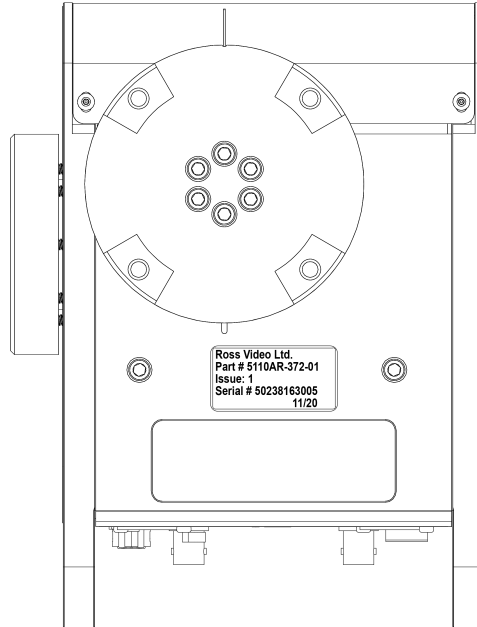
X350 Pan & Tilt Head (bottom view, camera cradle not shown)
